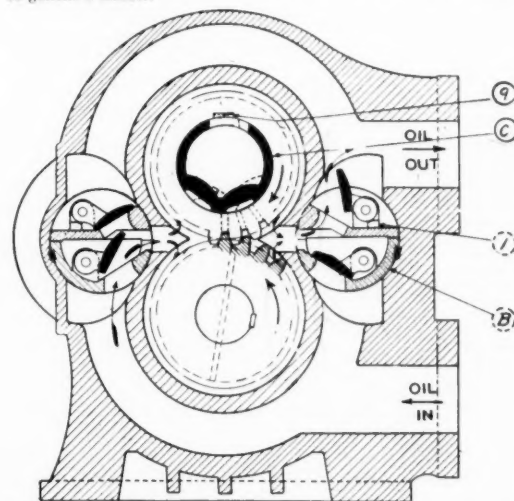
Sectional drawing of the main oil pump showing the constructional details of Fig. 5.
